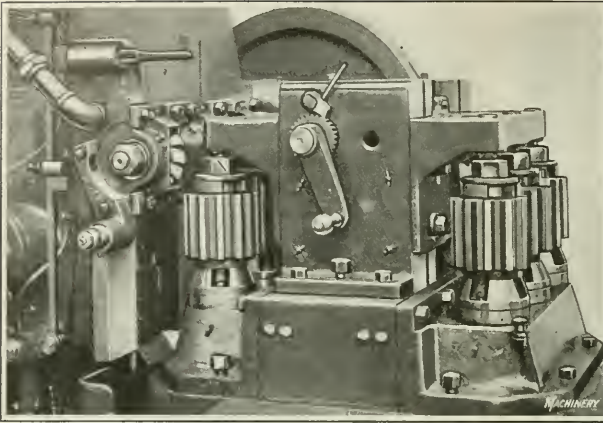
Example of Gear-cutting on Machine of Multiple-cutter Revolving-turret Type
